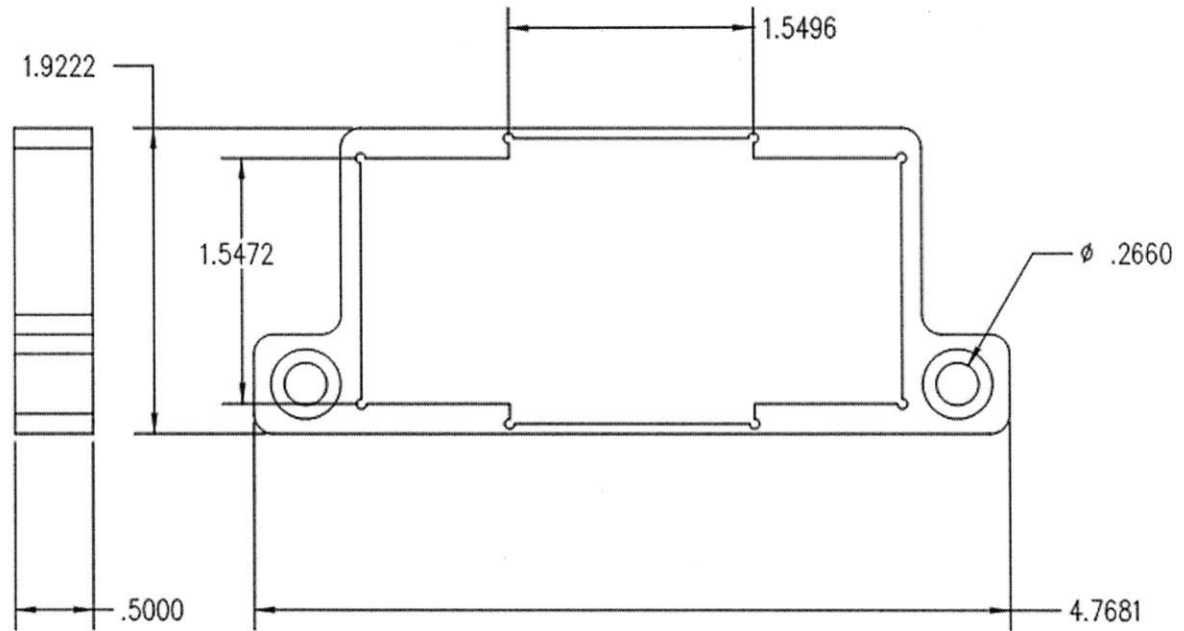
Dimensioned drawing of sub-unit L-shaped pieces
